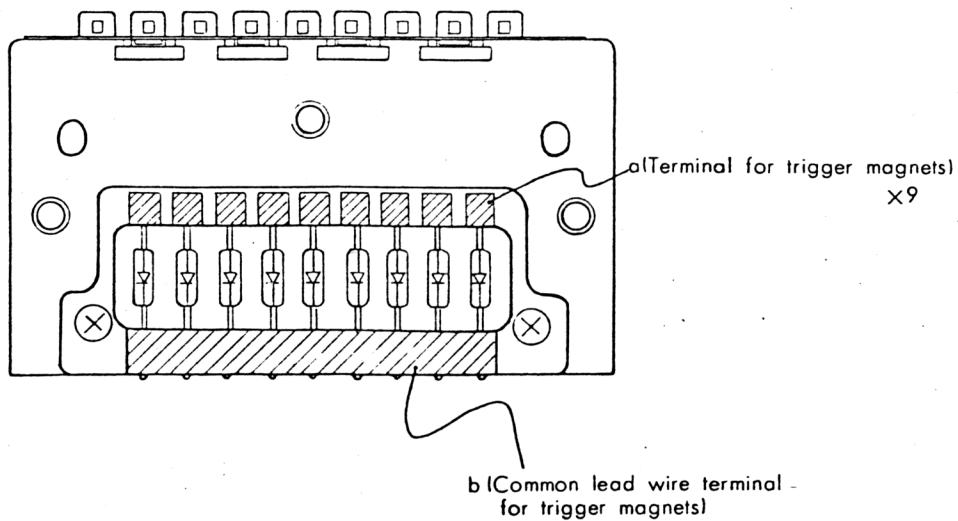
TRIGGER MAGNETS ASSEMBLY
